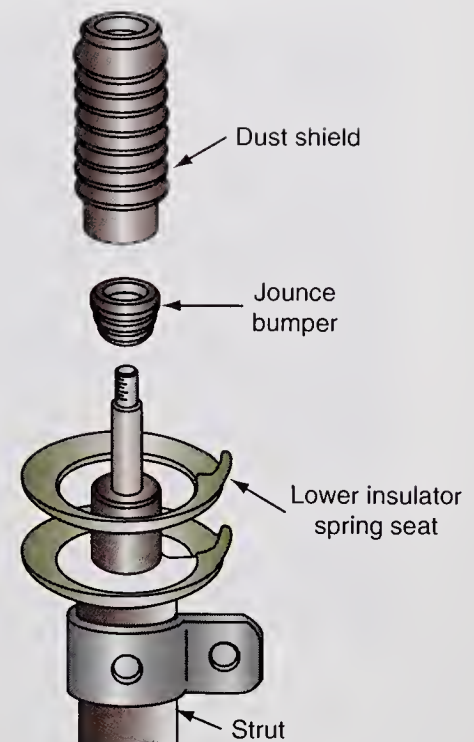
Removal of the dust shield, jounce bumper, and lower spring insulator.
